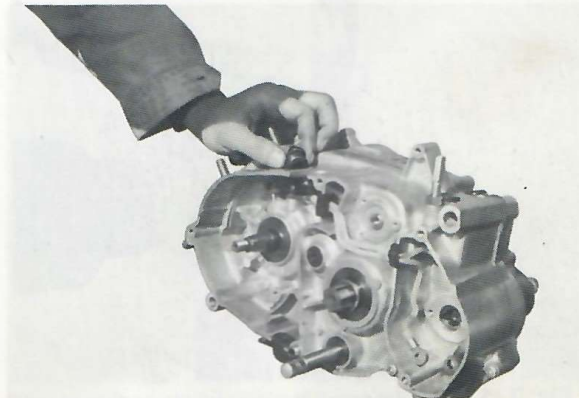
Taking off oil line union bolt inspection cap
